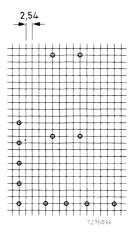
Hole pattern for mounting on a printed-wiring board (solder side).
